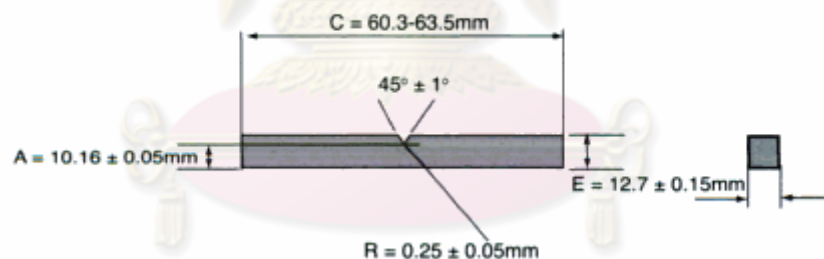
Dimension of impact test specimen ASTM D256 [39]
